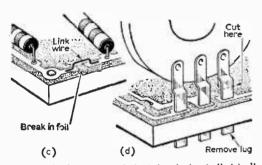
Bridging a crack in printed circuit "wiring". Fig. 5d: Removing a tagged component from a printed circuit board.
